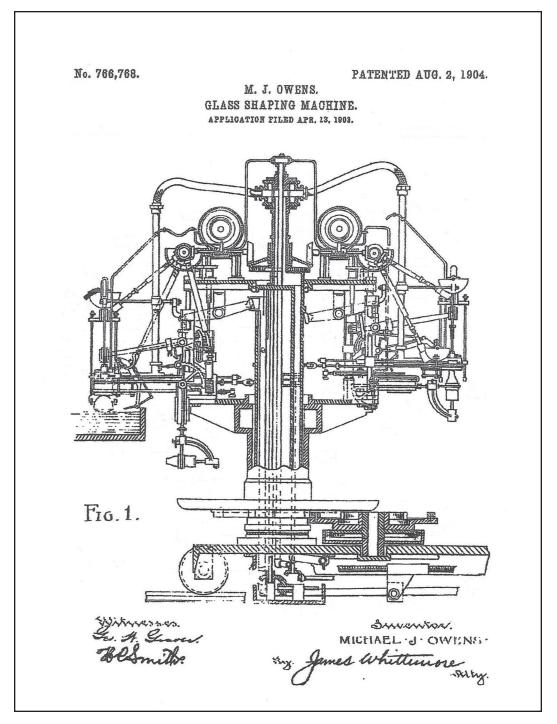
The first fully automatic Owens bottle-blowing machine, patent No. 766,768 granted 2 August 1904. Notice the blank mold on the left side of the machine resting on the surface of the molten glass in position to fill the mold and the blow mold below it. On the right side of the machine, the blow mold has been drawn up to replace the blank mold after the machine has rotated. (Owens 1903).
